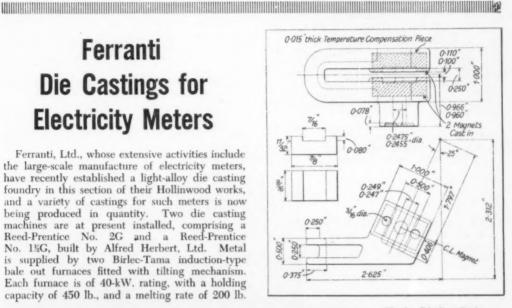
Die Cast Brake Magnet Assembly for a Ferranti Polyphase Meter
